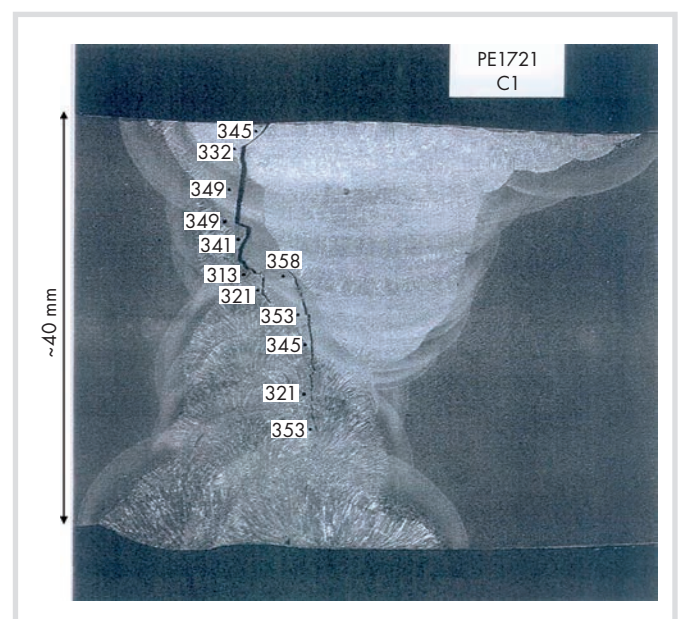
H-induced cold crack in S890 steel weld deposit [3].
